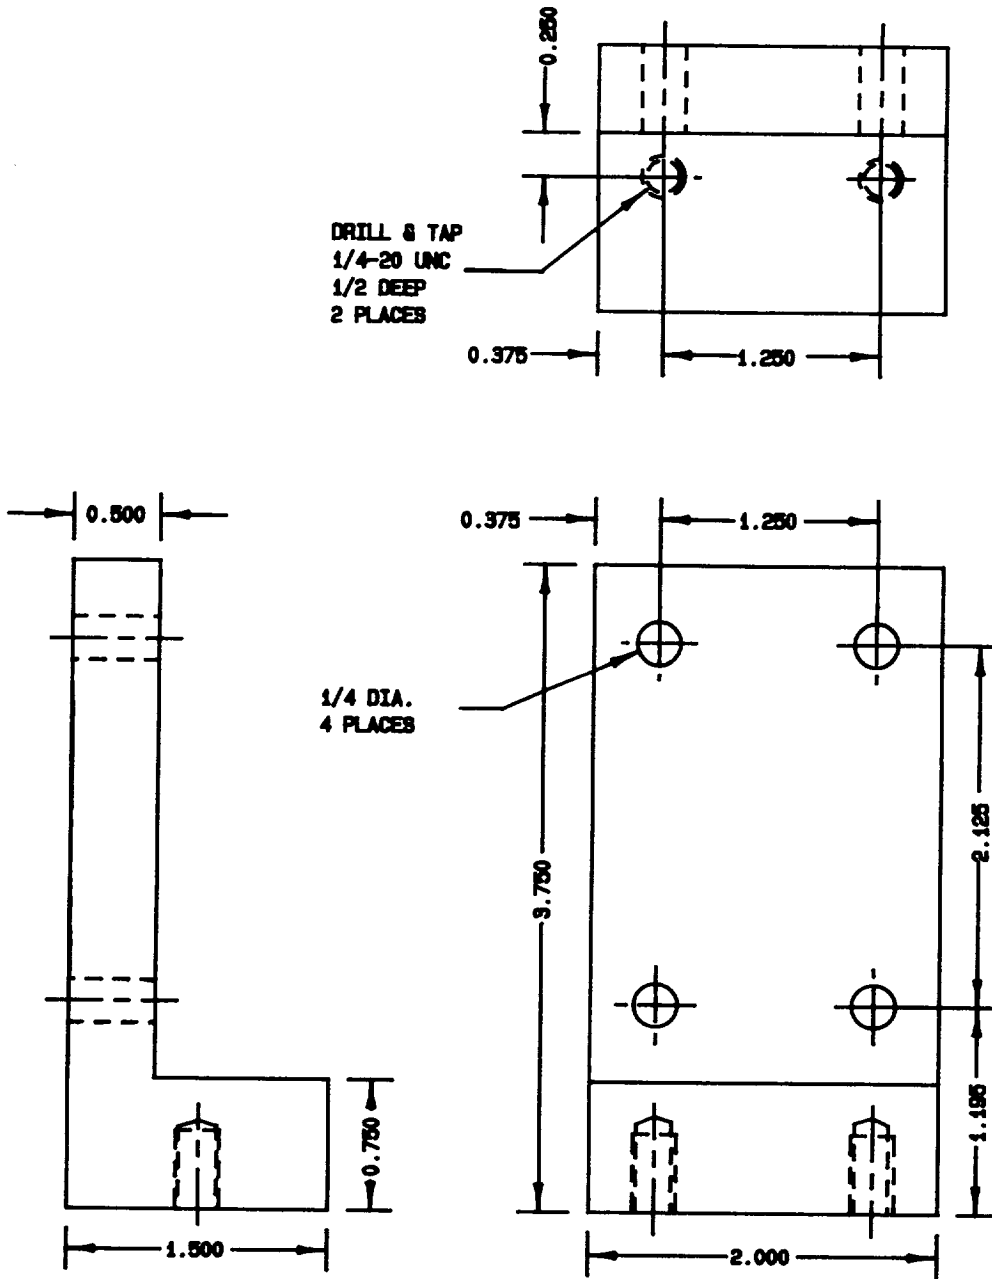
Iosipescu Shear Test Fixture Alignment Tool Assembly and Clamp Assembly.
